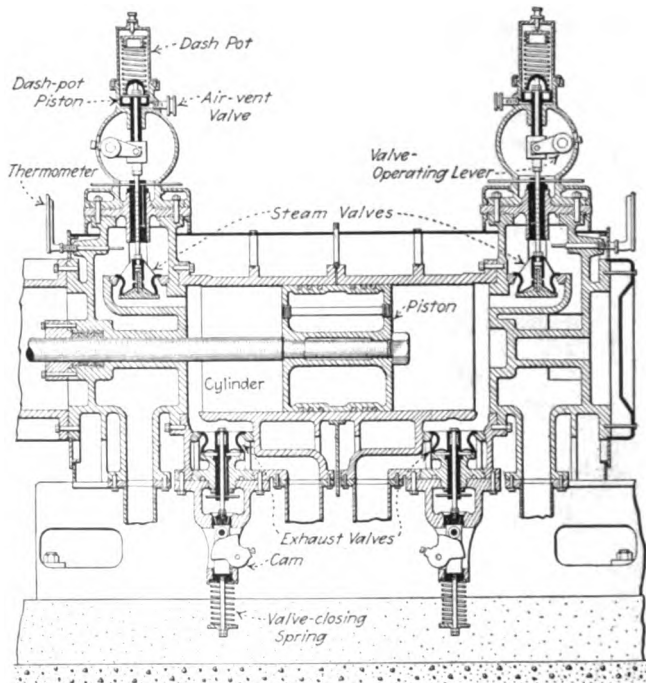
Longitudinal section through cylinder of Vilter poppet-valve engine. (Vilter Mfg. Co.)
